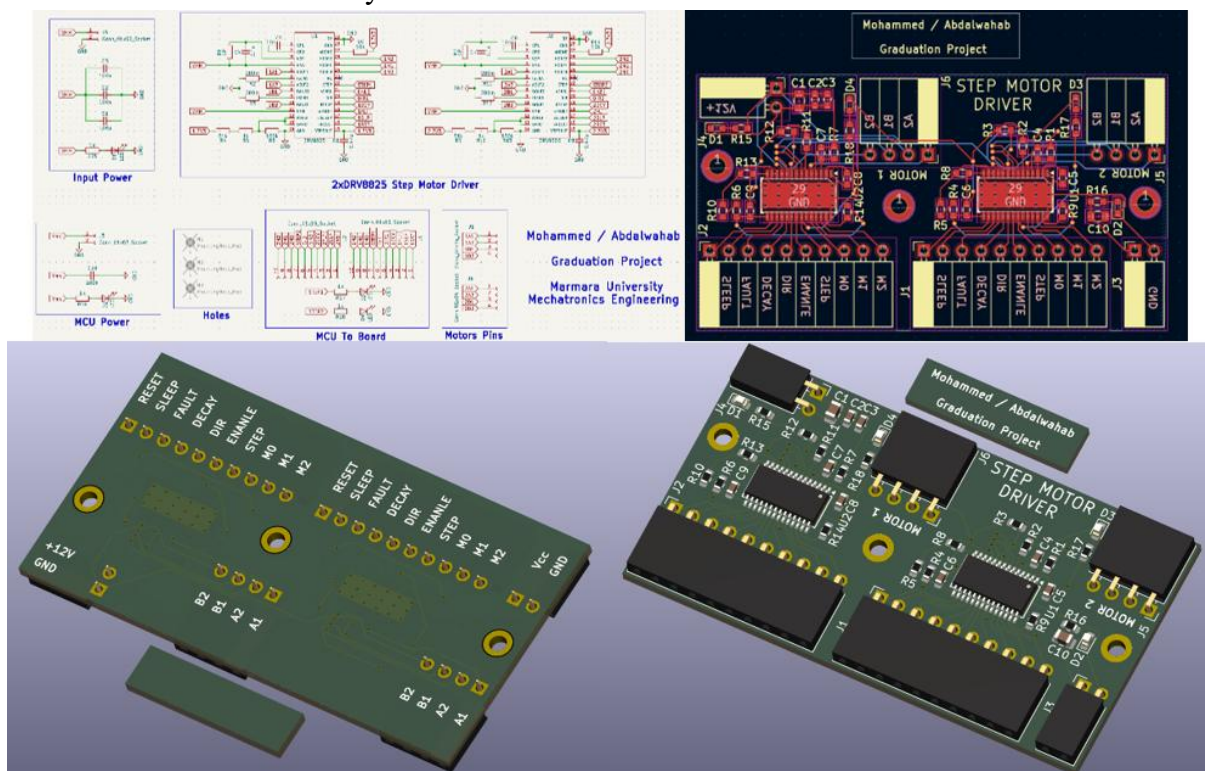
PCB Circuit Design, Layering, and 3D Modeling for SMD Design
